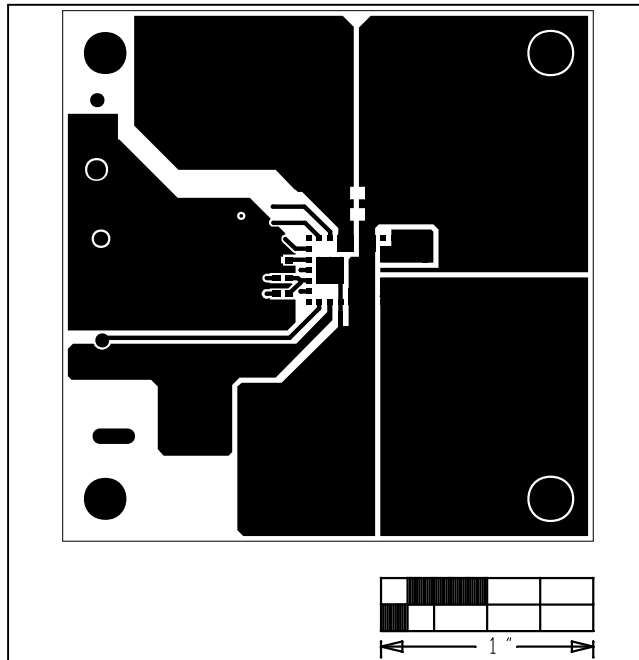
MAXM17504 EV Kit PCB Layout—Component Side
